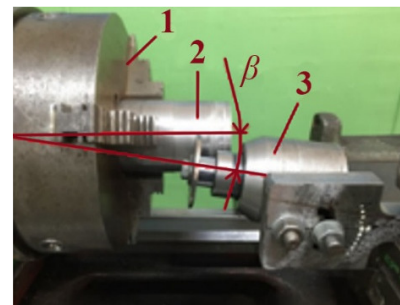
Rotational turning process of steel 45: (1) three-jaw chuck, (2) workpiece, (3) rotational tool; (β) angle of installation of the cup cutter.
